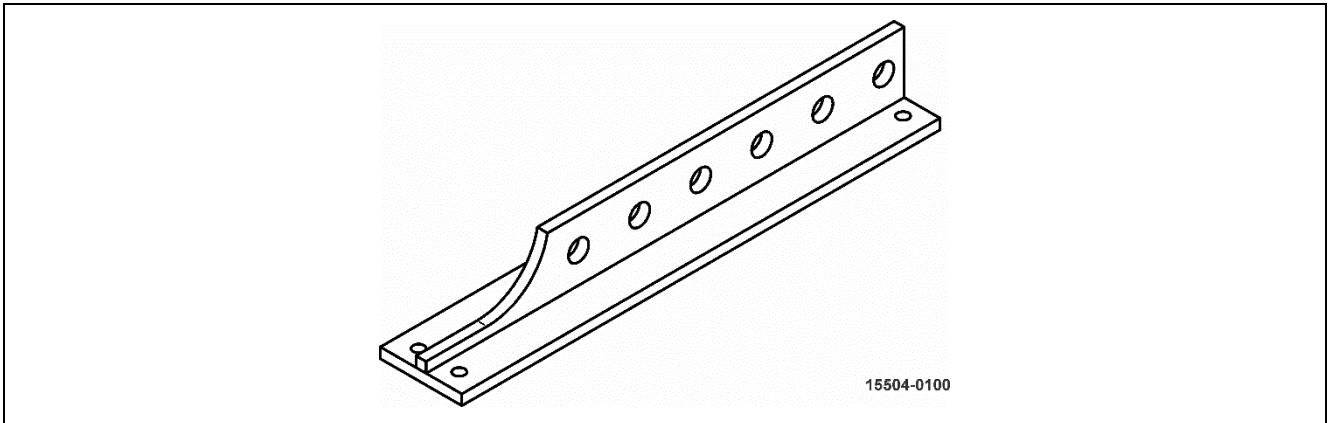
G200 Lifting Fixture - (P/N R1036777)
